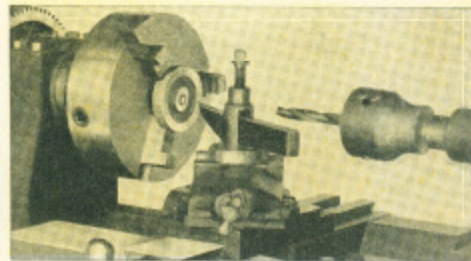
Drilling and Facing a Cast Iron Gear Blank Held in a Three-jaw Chuck.
